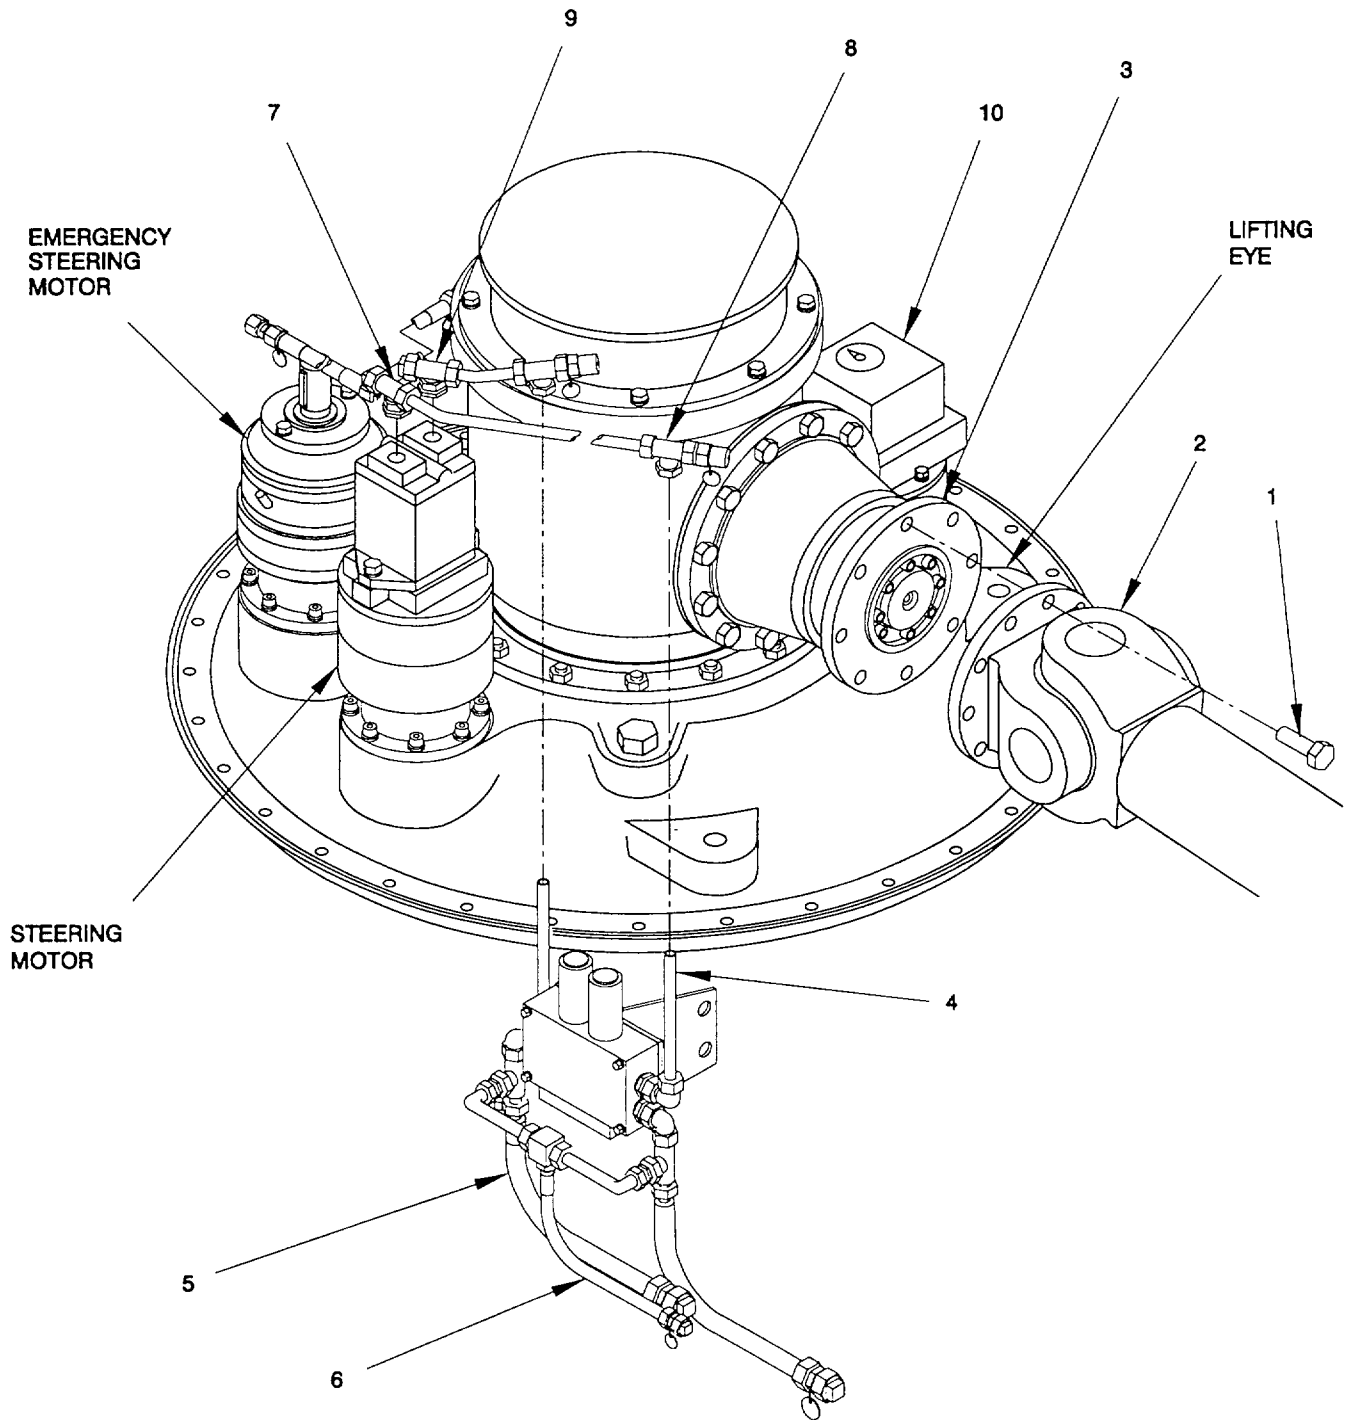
Pump-Jet, Remove, Install (Sheet 1 of 3).
